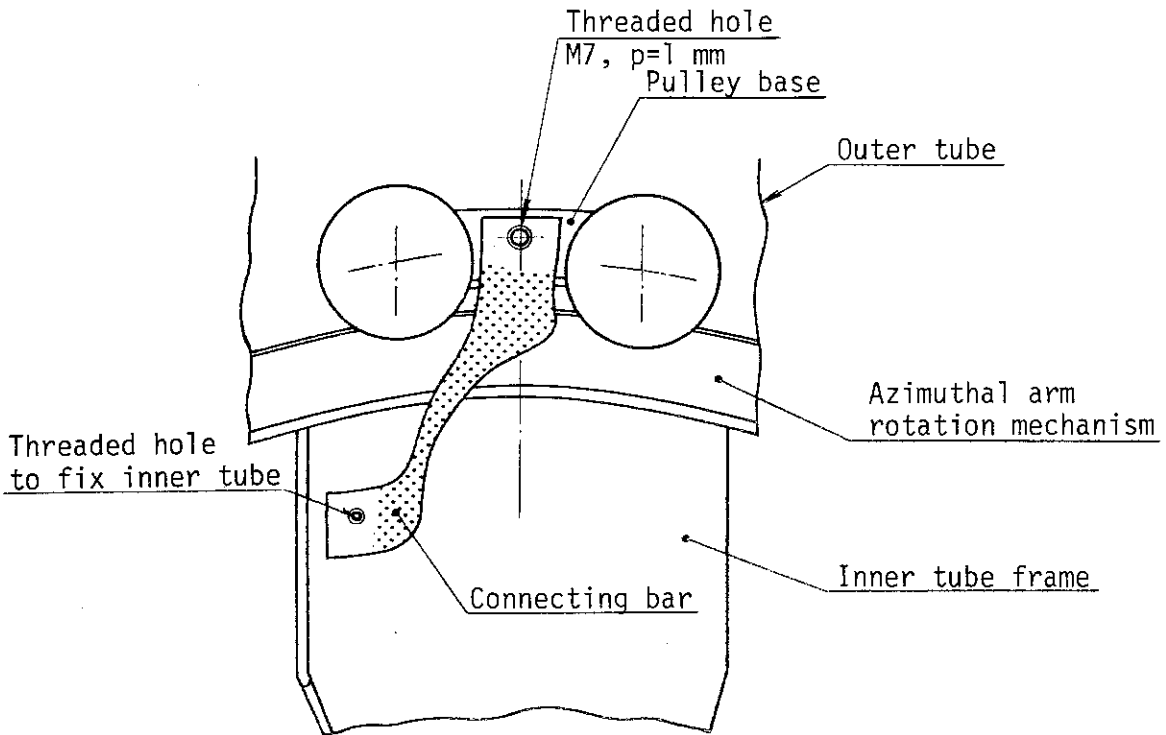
Connecting bar of outer tube and inner tube for non-rotation
